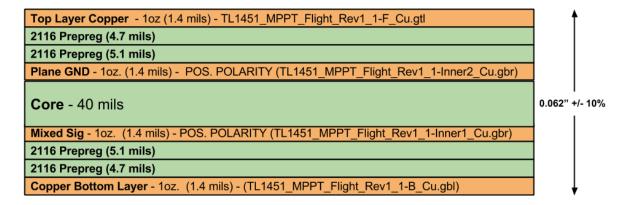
Four layer PCB stackup used on the Fox-1 MPPT Rev 1.1 PCB
